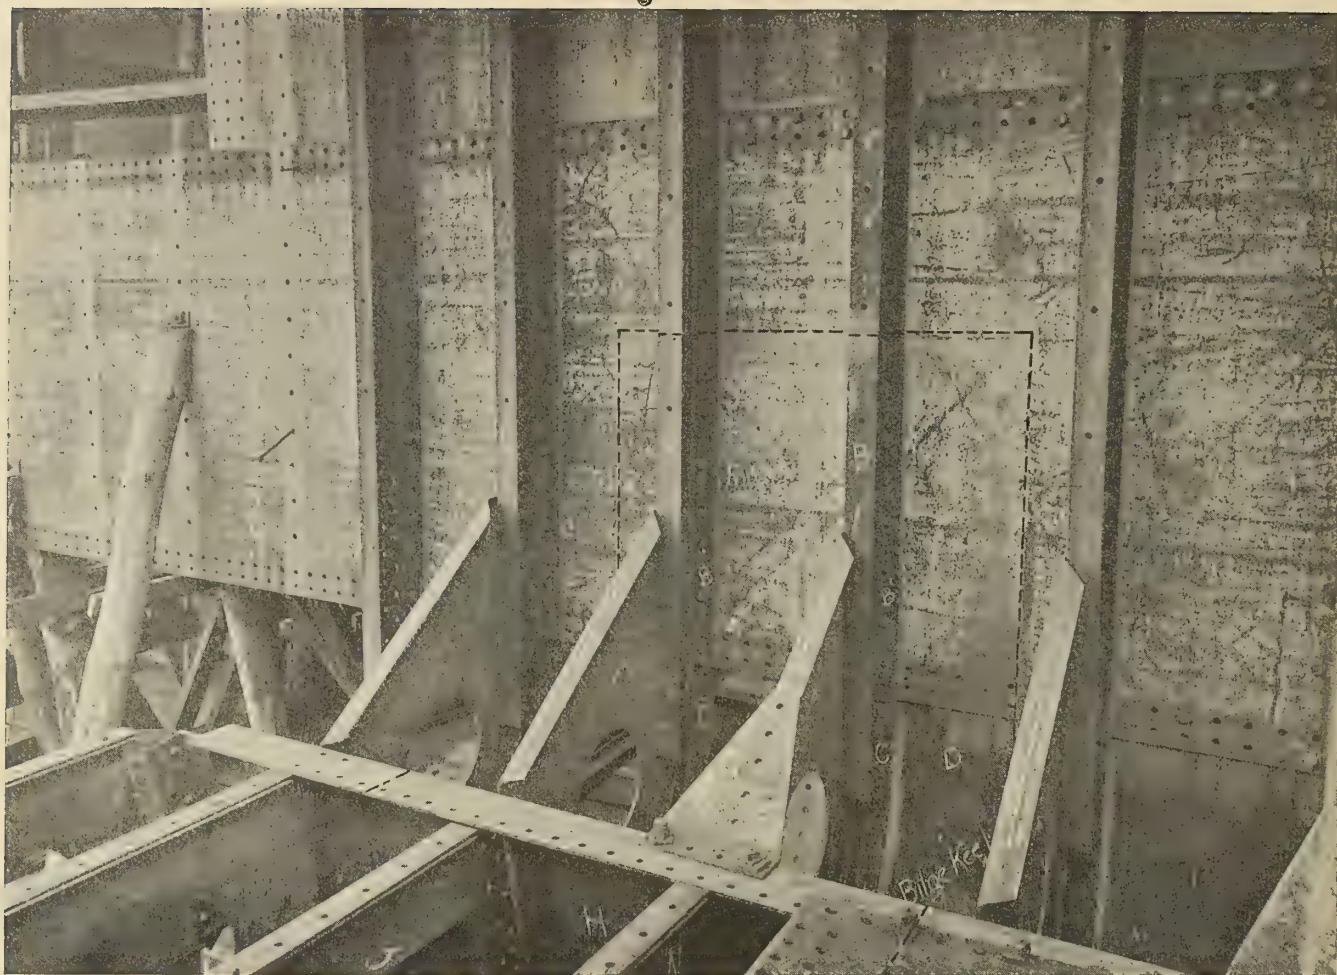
Bilge Section of Standard Riveted Cargo Ship. See Fig. 8 for Duplicate of This Section, Reproduced as an All-Welded Structure
